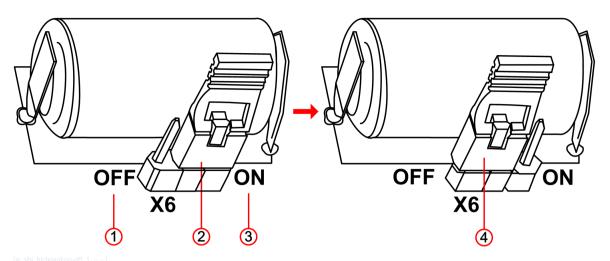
3-Pin (X6) Jumper Pin on PCBA
